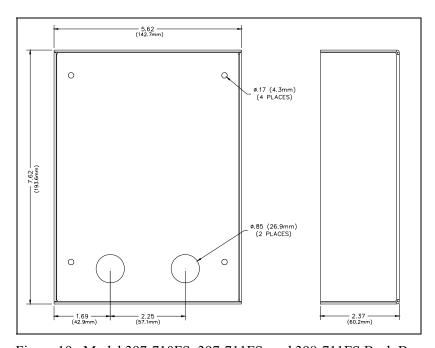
Model 397-710FS, 397-711FS, and 398-711FS Back Box
